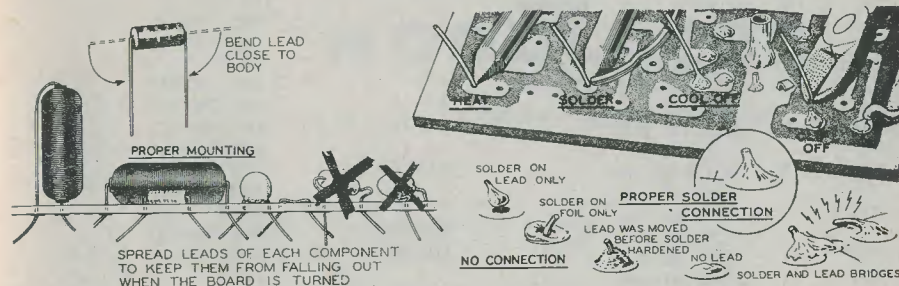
Showing the component mounting and circuit board soldering procedure—right and wrong methods
